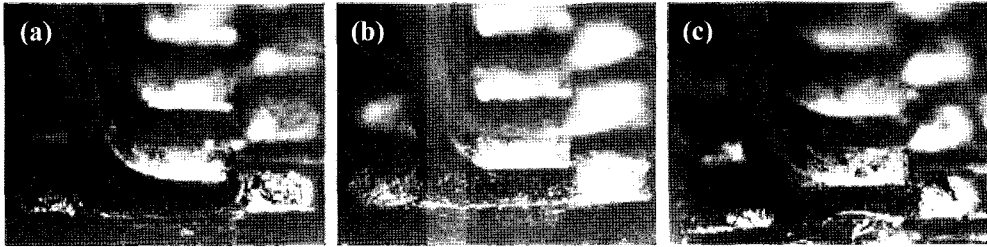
The appearance of Sn-8Zn-3Bi solder joint. (a) Sn plating on Cu LF (b) SnBi plating on Cu LF (c) SnPb plating on Cu LF.
